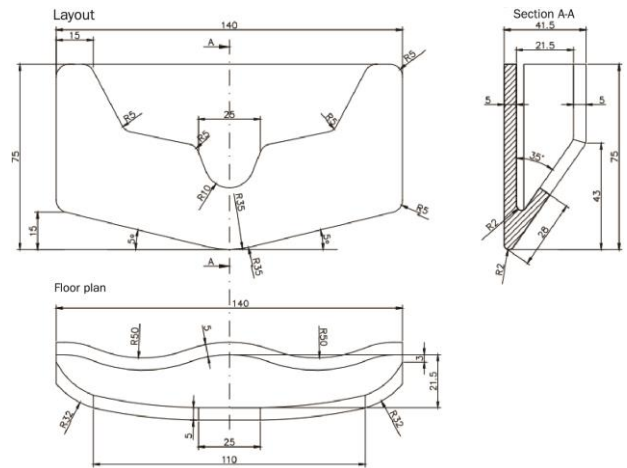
Design layout of the replaceable segment of the clamp's wear surface
